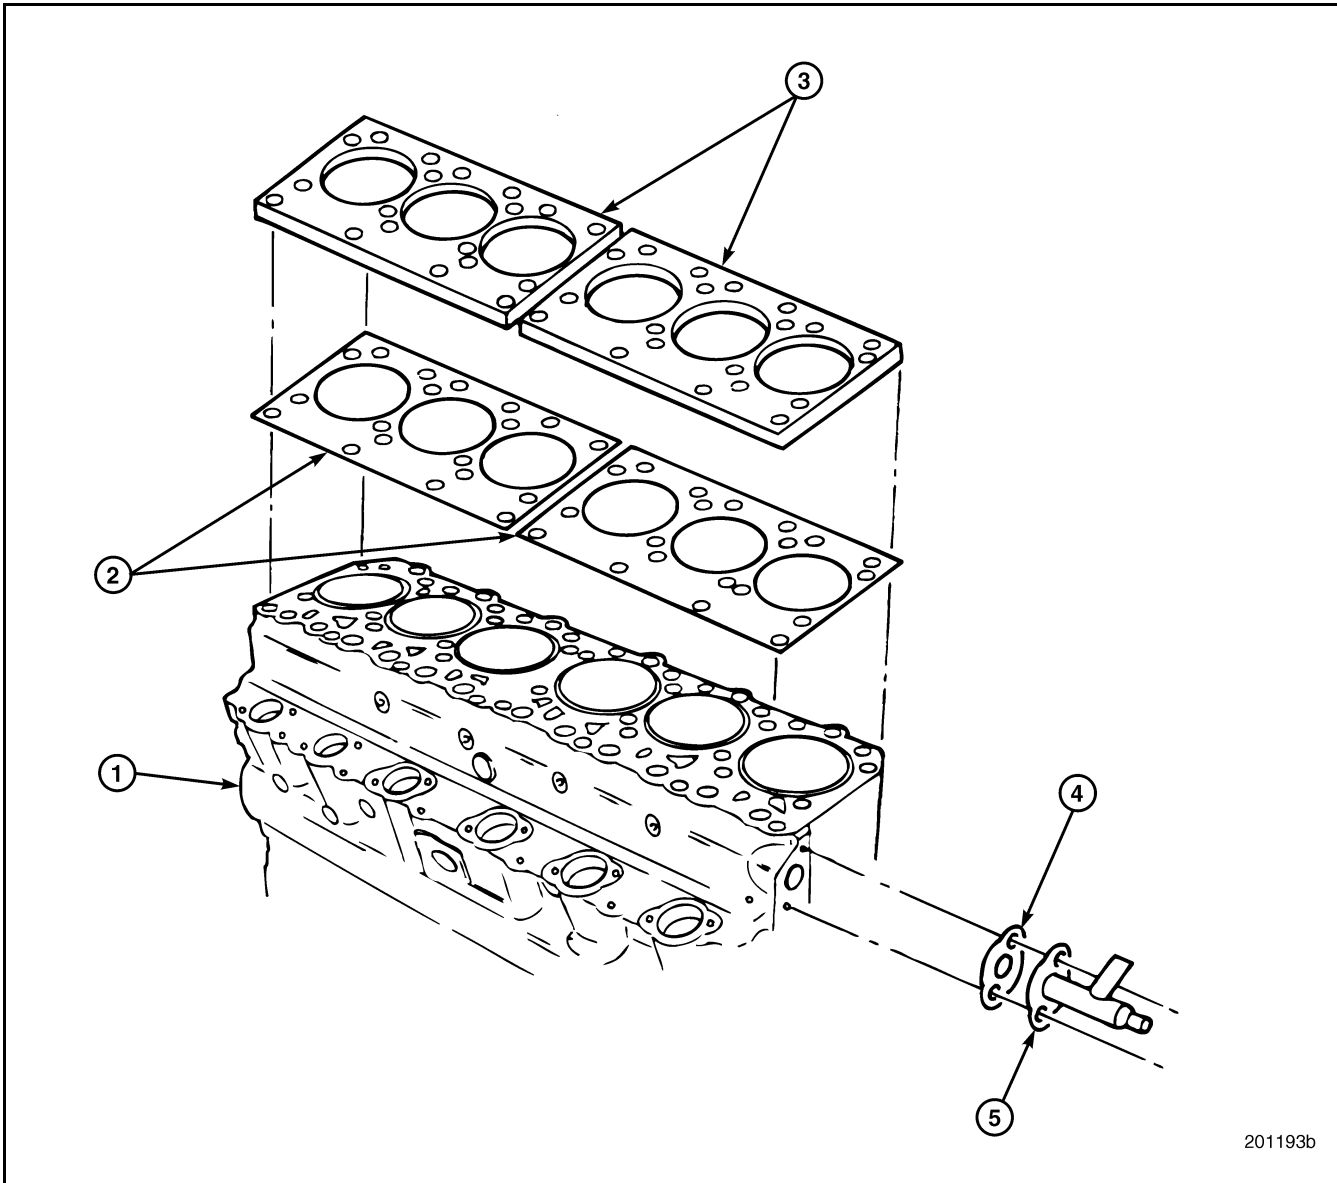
Cylinder Block Coolant Passage Leak Check (Out of Chassis)
